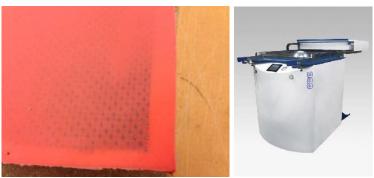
Spring steel mesh in a silicon layer & Figure 50b: The Formech 686 vacuum forming machine (Scouten Group, 2015)
